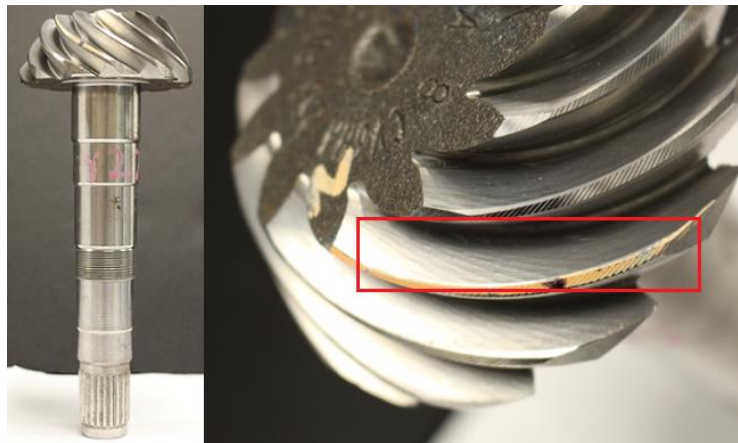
Illustration of a pinion gear and targeted measurement area
